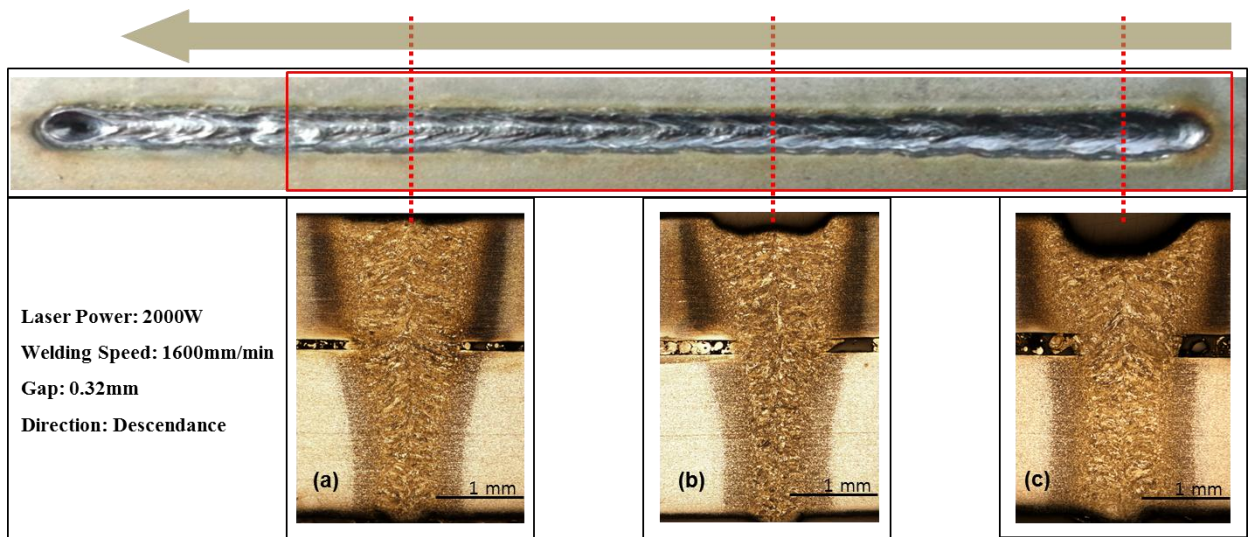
Laser Power: 2000W, Welding Speed: 1600mm/min, Gap: 0.32mm, Direction: Descendance
